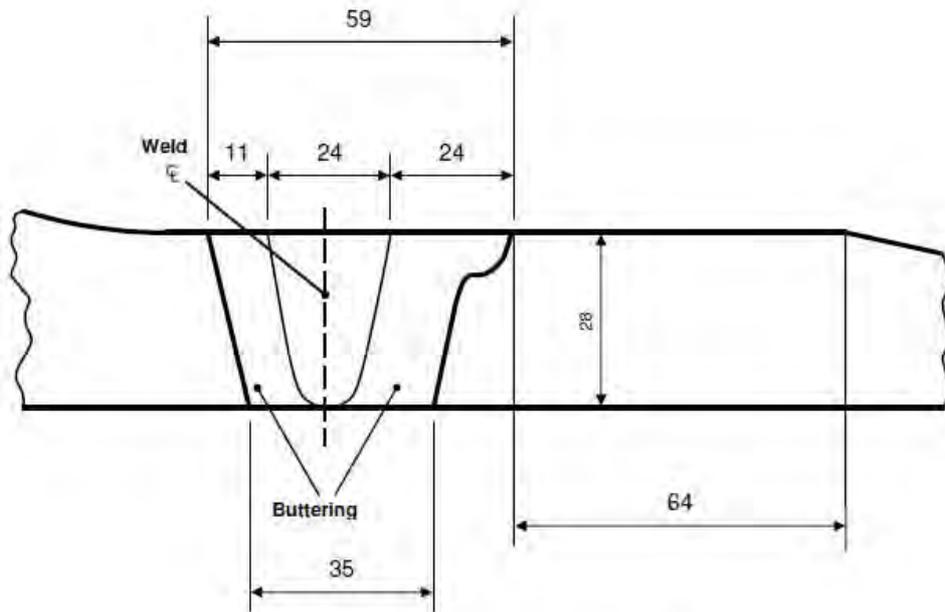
Sketch of the feedwater nozzle dissimilar metal weld
